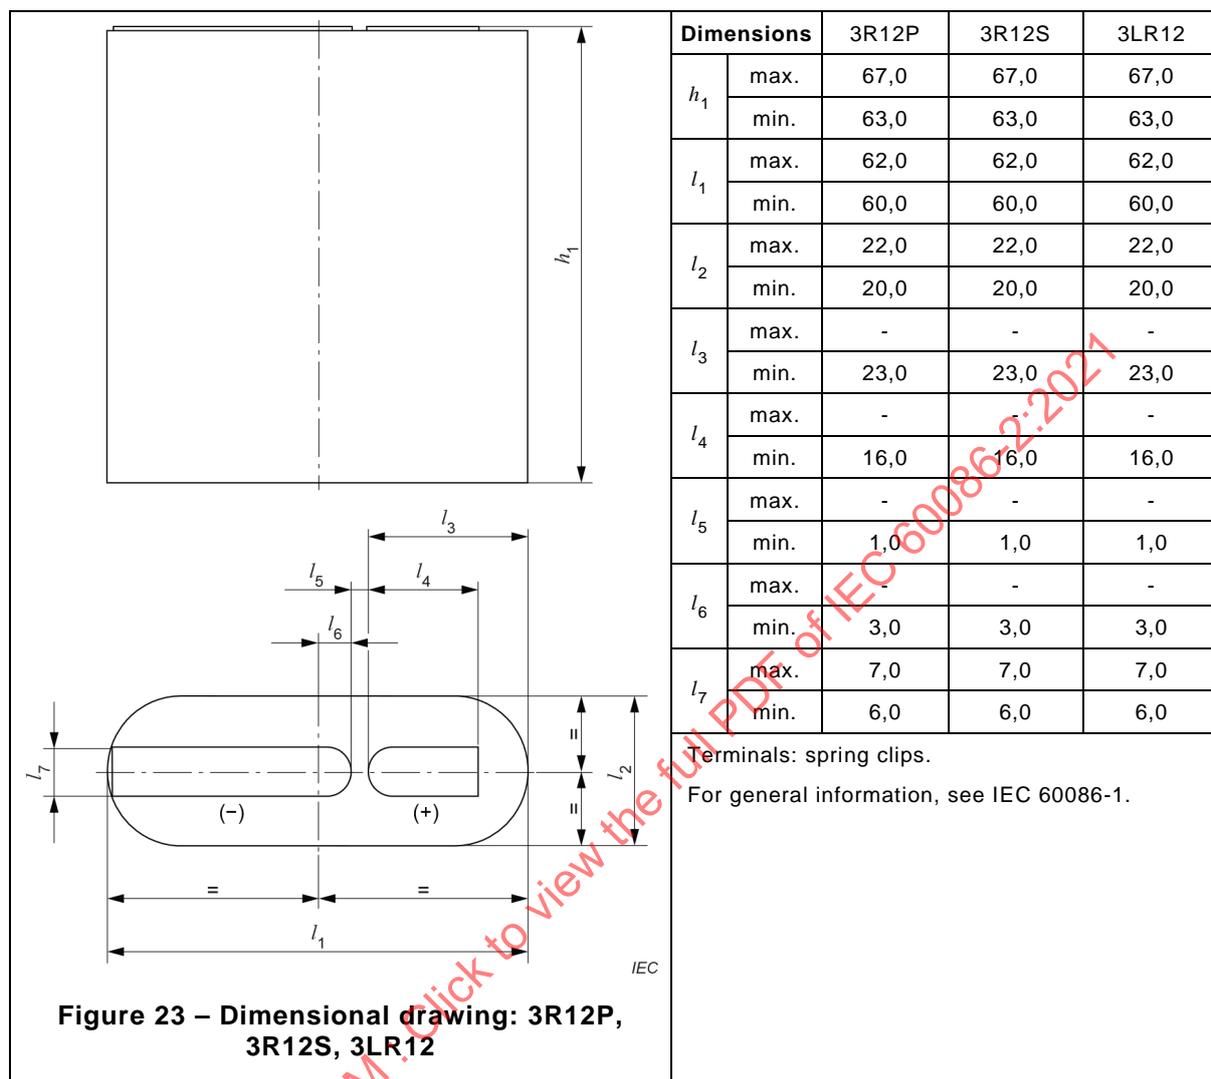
Dimensional drawing: 3R12P, 3R12S, 3LR12
